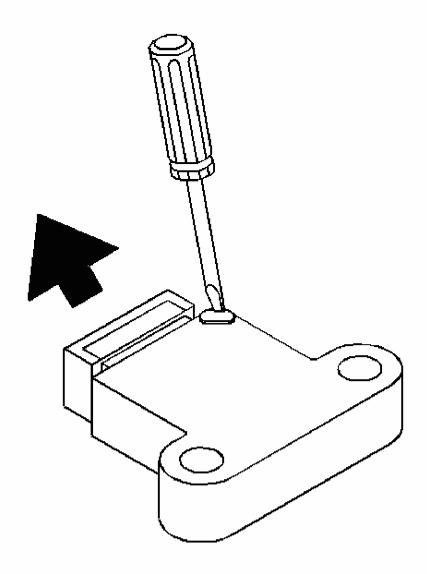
Locking Primary Camshaft Drive Chain Tensioner Shoe Into Collapsed Position
